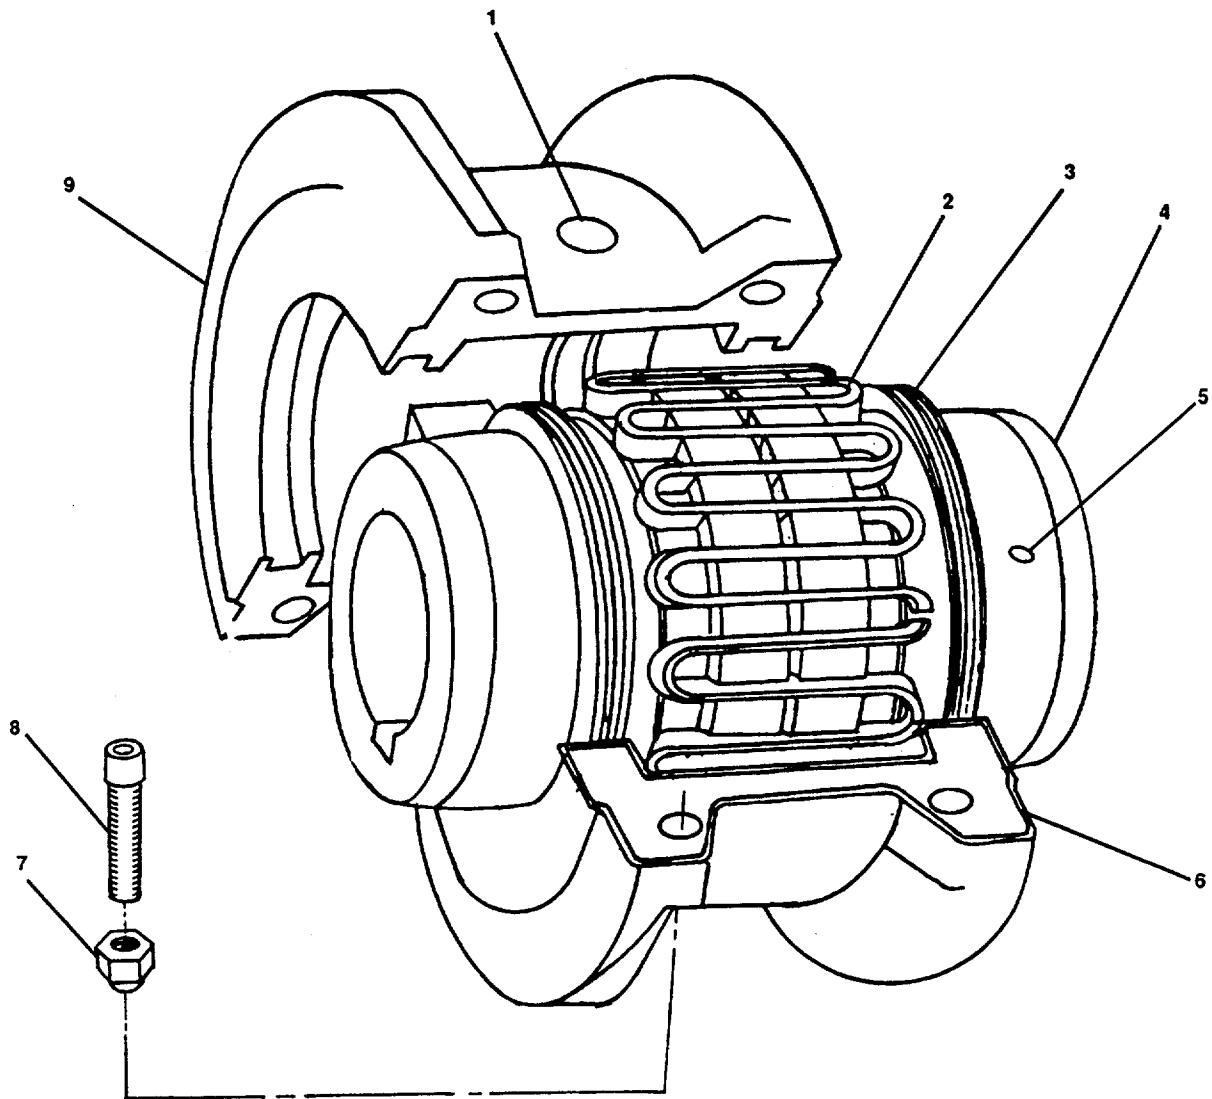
Flexible Shaft Coupling Assembly.
